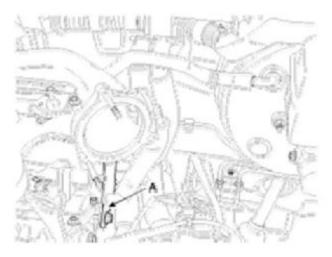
Identifying Surge Tank Stays (1 Of 2) Courtesy of HYUNDAI MOTOR CO.
